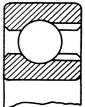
OLD TYPE NOTCHED BEARING RACE
